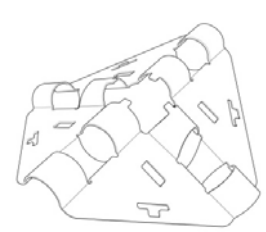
FEMALE JOINT FOR STEEL FRAME SHELTER
